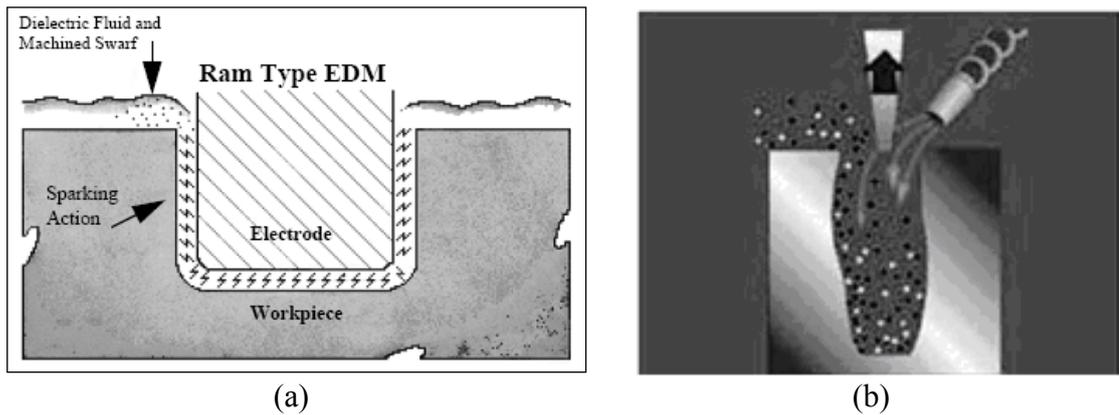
(a) Control spark removes metal during electrical discharge machine (by Technical Service Department-Brush Wellman Inc.); (b) Erosion process: ball-screw die-sinker (Zhao *et al.* 2003)
